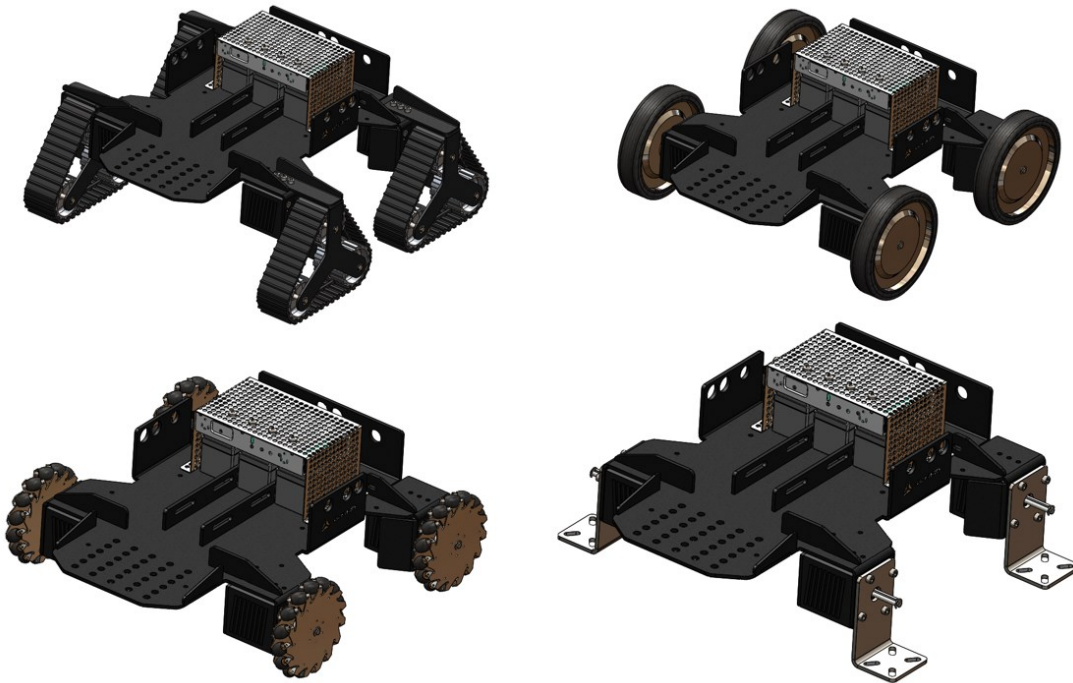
All wheel and stationary configurations mounted on the base with the motors.
